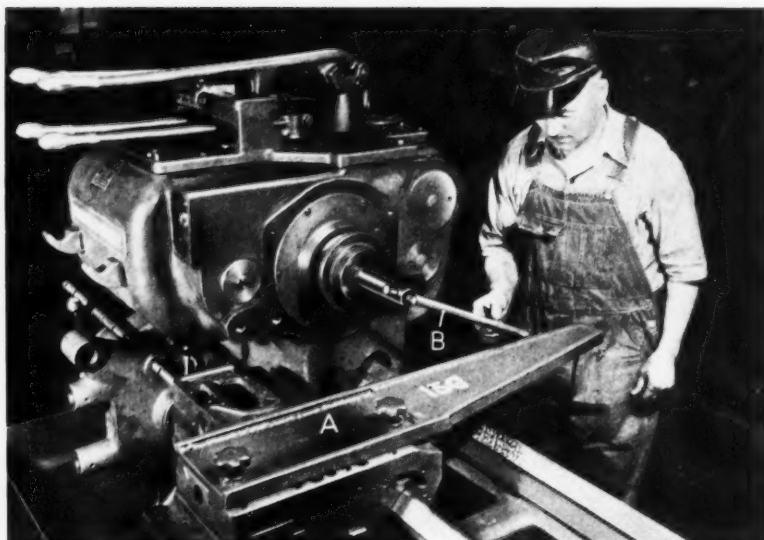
(Left) Method of Checking the Alignment of a Turret Lathe Spindle with the Bed Ways, Using Long and Short Mandrels
